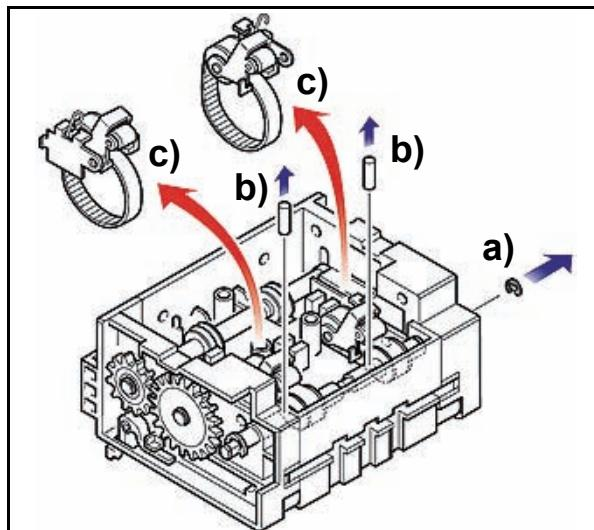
Acceptor Head Drive Belt Assembly Removal
